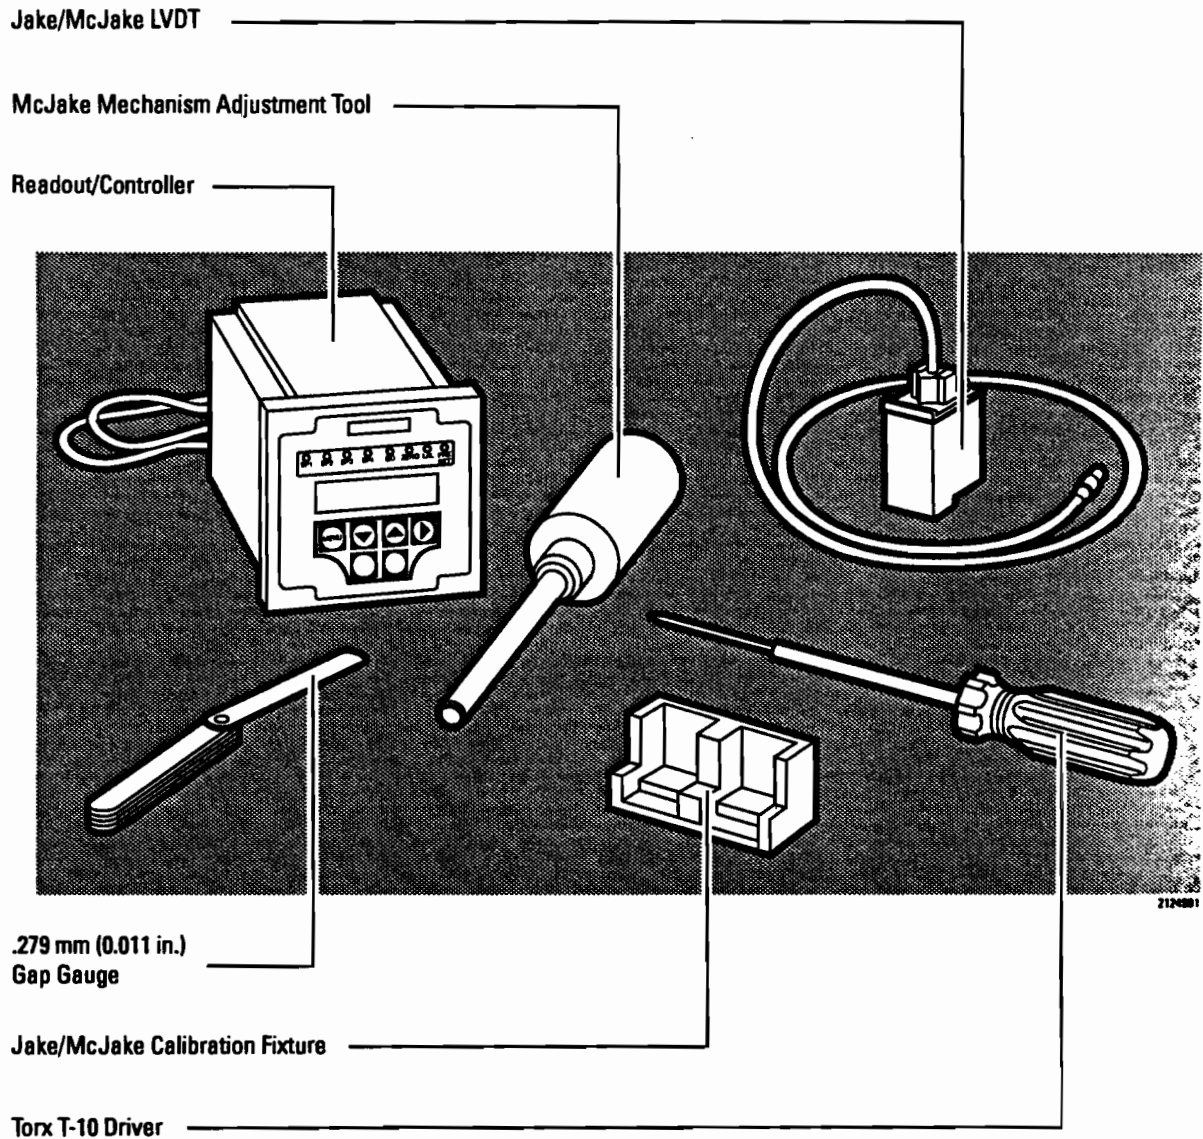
Required Tools to Check and Adjust Jake and McJake Mechanisms
